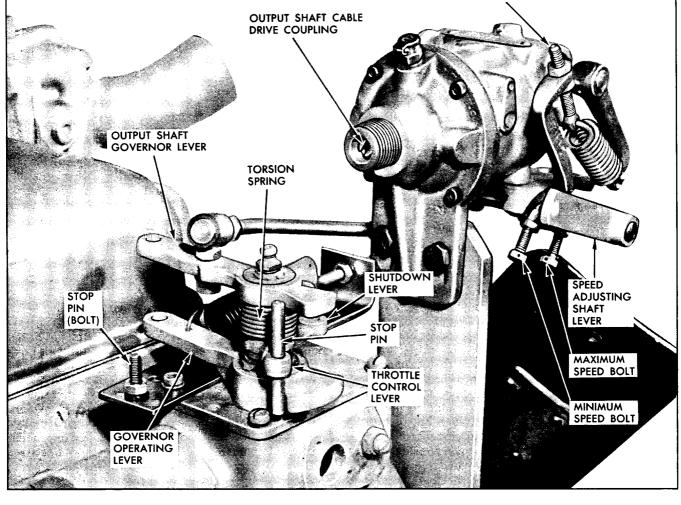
Mounting of Output Shaft Governor and Linkage to Engine Governor – Viewed from Rear of Engine
